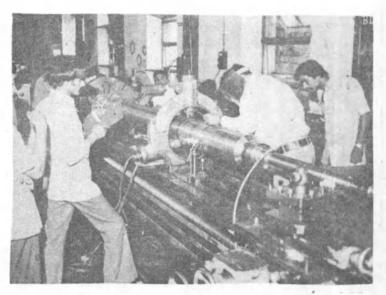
gives general arrangement of shaft on lathe for welding and Plate-2 shows the close up view of welding with details of gas connections and distortions monitoring devices.
